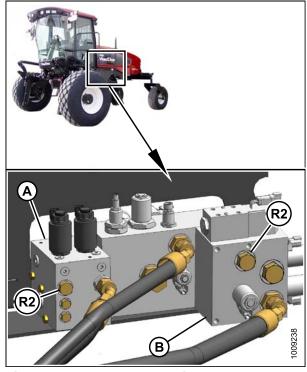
Valve Blocks with Reverser Valve in Factory Configuration
